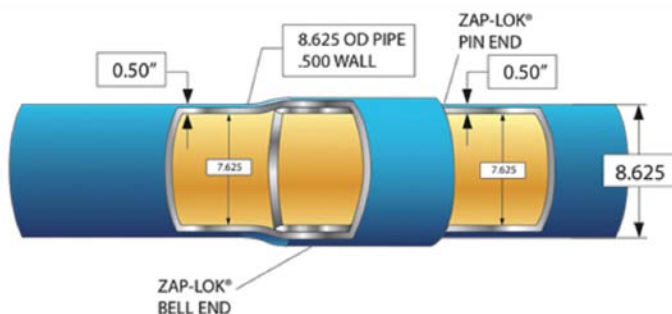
Typical Zap-Lok<sup>®</sup> Connection
